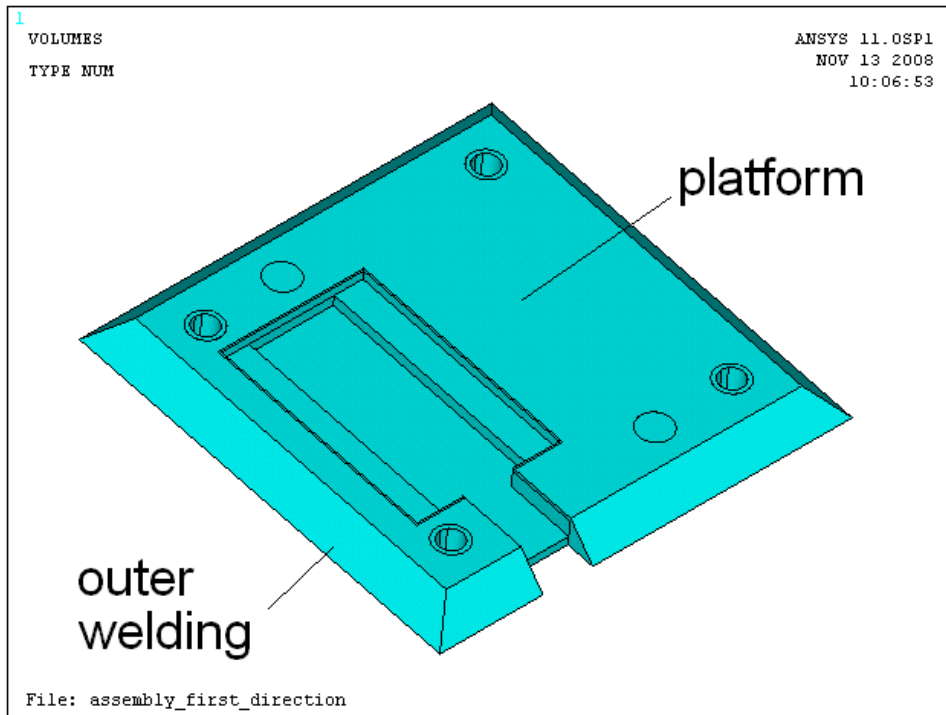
platform basic solution with outer welding (configuration a)
